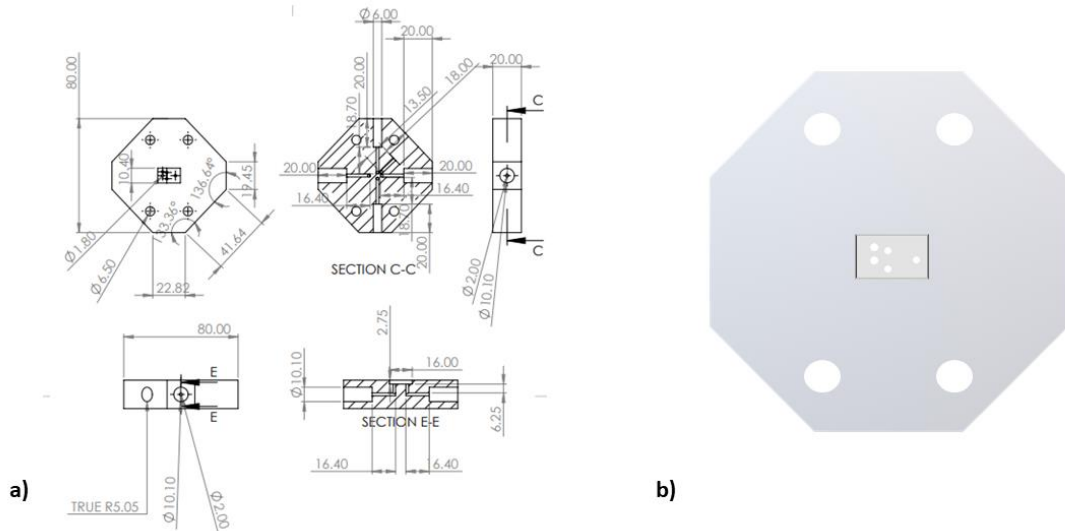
Sandwich holder package a) Design of the sandwich holder with important dimensions. b) Schematic of the sandwich holder.
